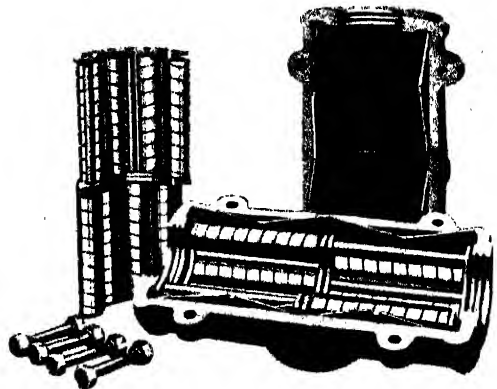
SPLIT SHAFT ROLLER BEARINGS. This type of bearing can be fitted or removed without taking down pulleys, collars, clutches, or other shaft fittings.
